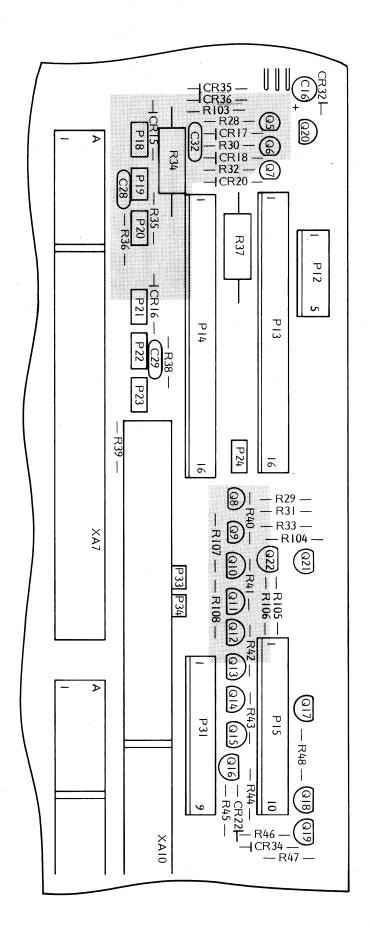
A6 Het/YIG Driver PCB, Assy. 660-D-8006-3, -4, -6, -7, -8 Schematic (Sheet 3 of 3)
